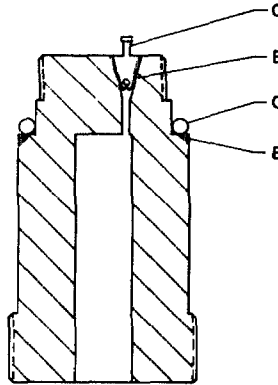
Bottom Closure Plug: B, beveled ring; C, cone; E, epoxy seal; and O, O-ring.
